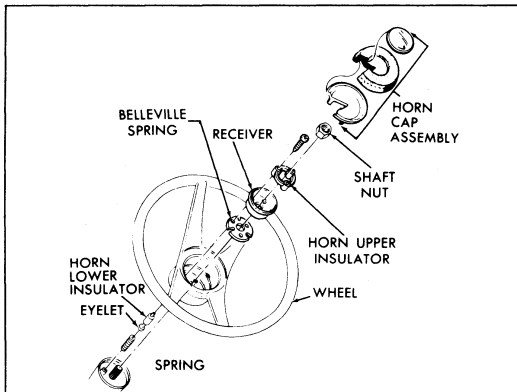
B4-32--Cushioned Rim Steering Wheel Explode--Typical
